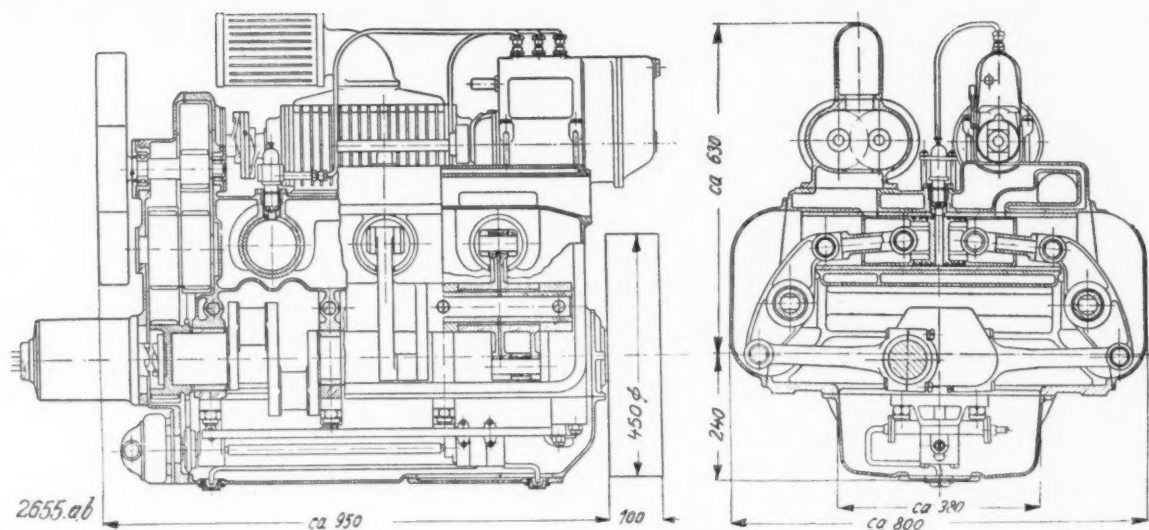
TWO-STROKE-CYCLE CAPPA DIESEL ENGINE
